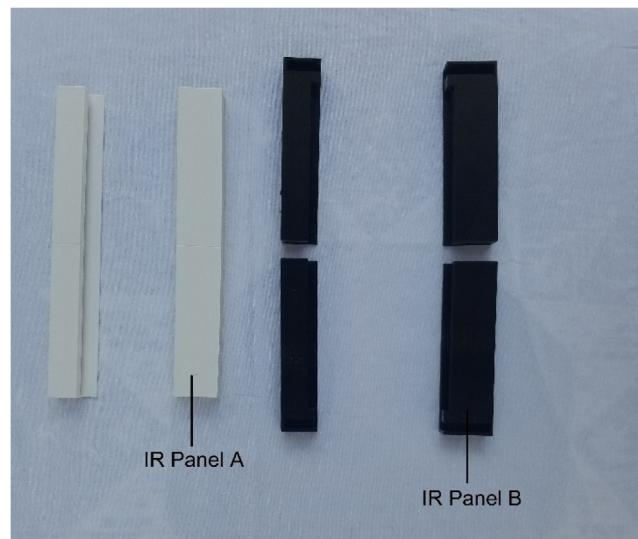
3D printed supports for IR emitter and sensor panels (D01).
